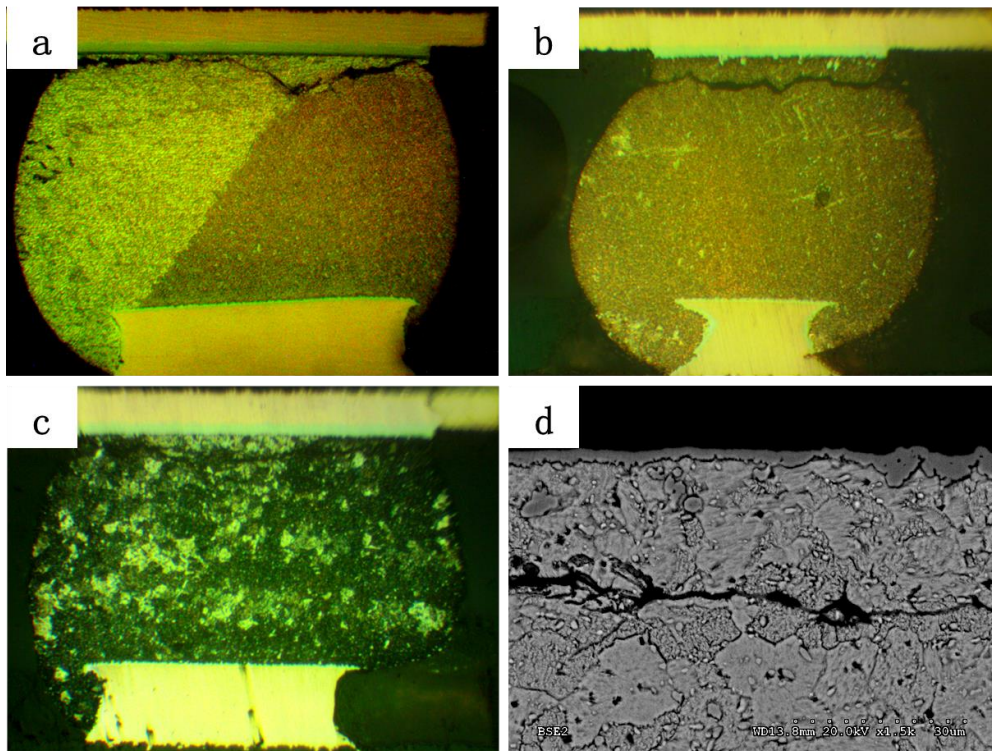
crack path of the solder joint after shear fatigue test at room temperature, 8% strain, 1Hz for (a) slow cool, (b) medium cool, (c) (d) fast cool.
